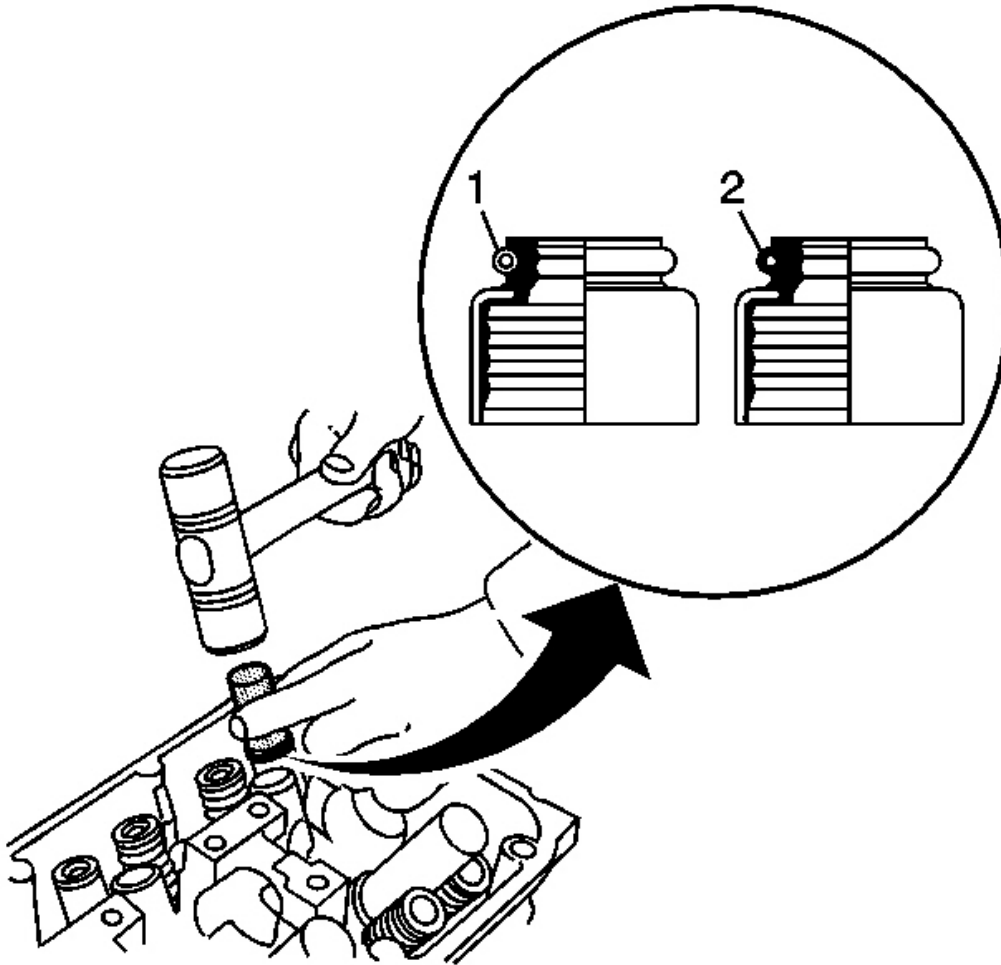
View Of Valve Stem Oil Seals Onto The Guides
